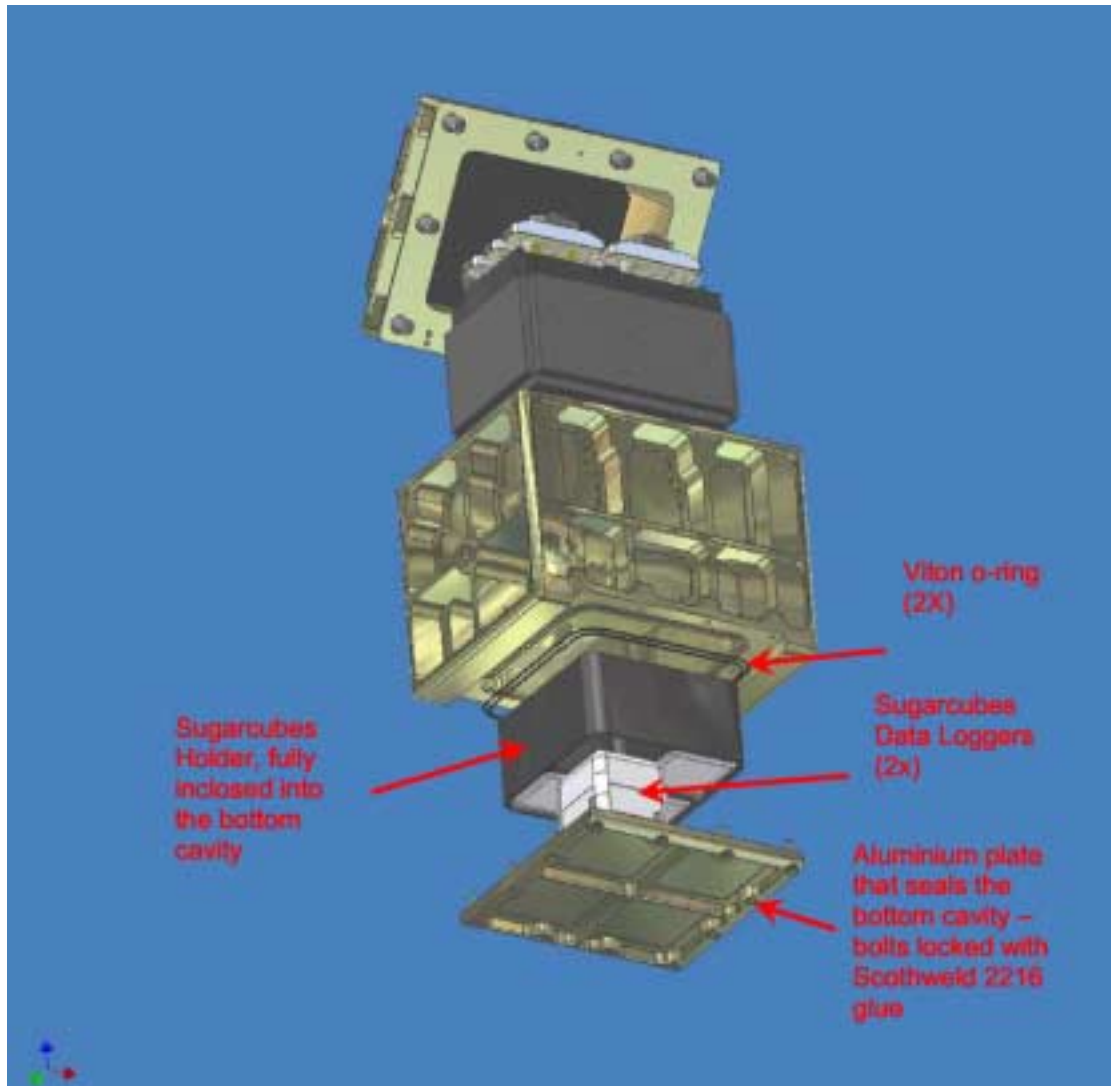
The PROMISS 3 Return Container - Exploded view showing the Sugarcube Cavity
